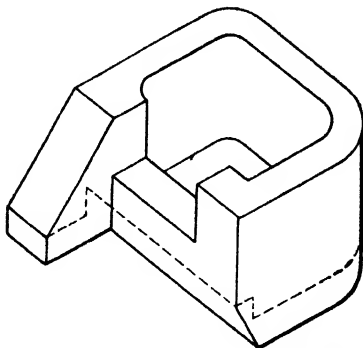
Sketch of a molding having an irregular parting. The broken line shows where the mold parts and indicates where the flash has to be removed.
